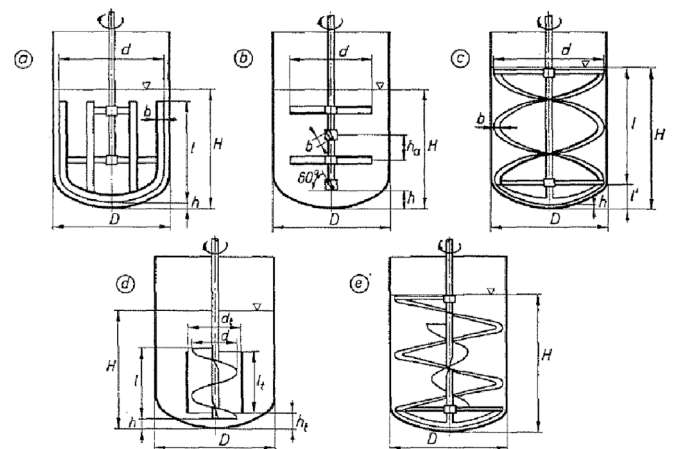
The drawings of the most investigated impellers. a) anchor impeller, b) multi-paddle, c) helical ribbon, d) and e) helical ribbon screw impellers. [22].
